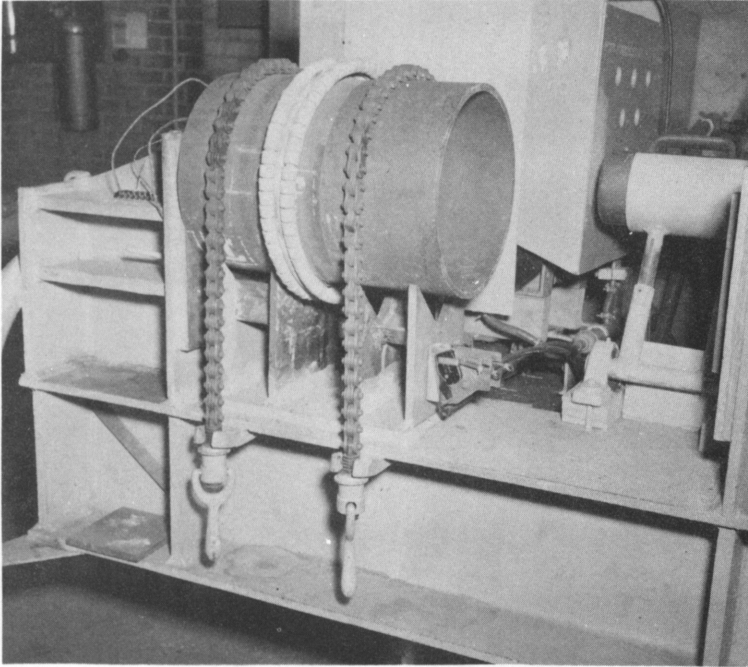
INDUCTION FORGE WELDED JOINT
